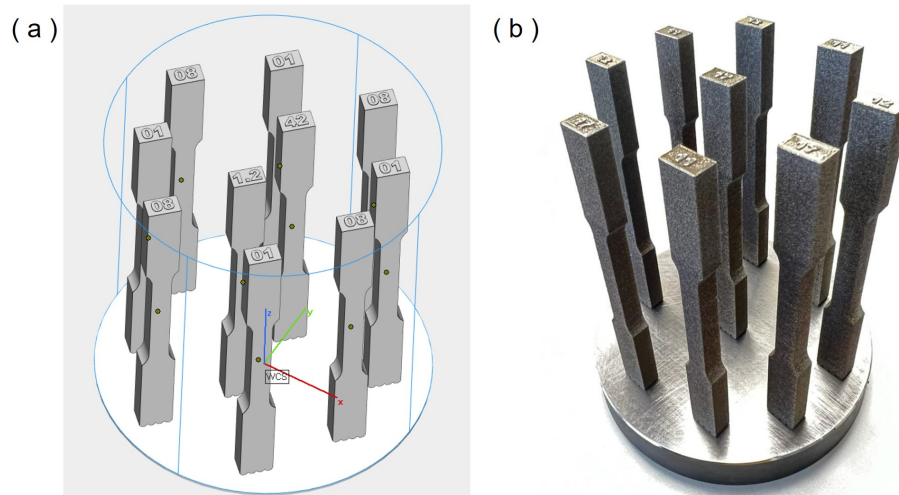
Rectangular subsize ASTM E8/E8M tensile specimens (a) designed by CAD and (b) printed in L-PBF.
